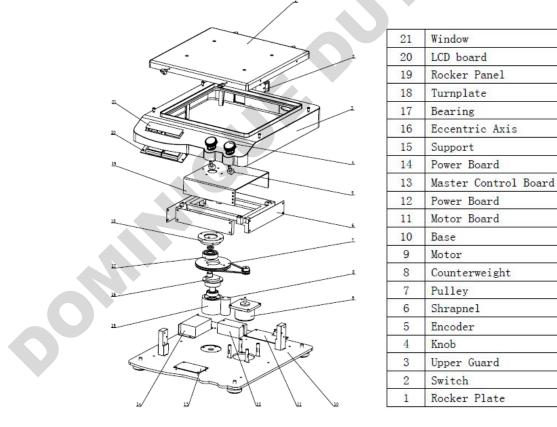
illustrates the separated structural components of SK-O330-Pro, and Fig. 3 is the Exploded View of SK-O330-Pro. Base Modules include Base, Power Board, Master Control Board, Driver
